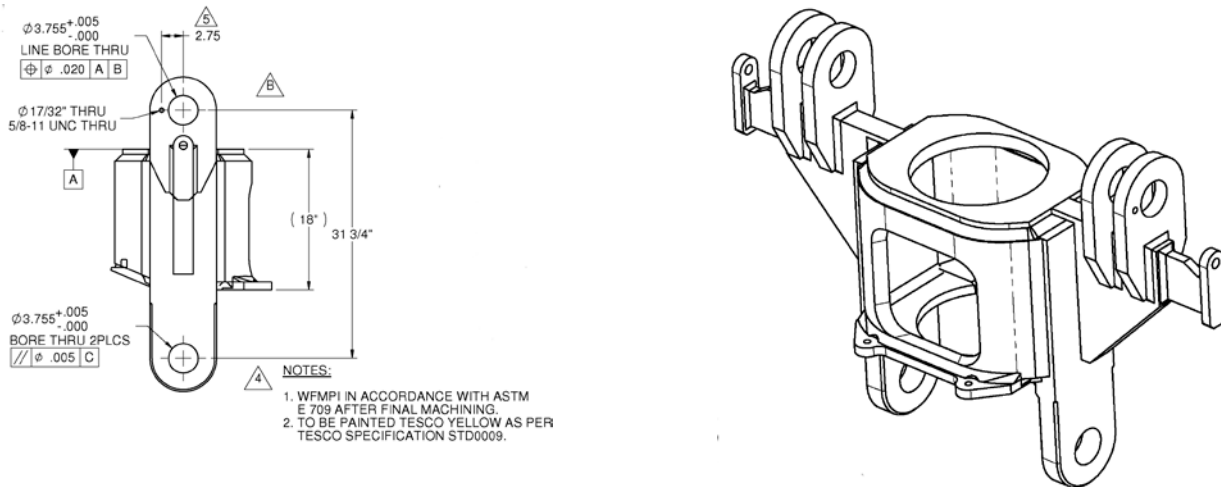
Corrected Bolt Hole Locations on Split Block Adapter
